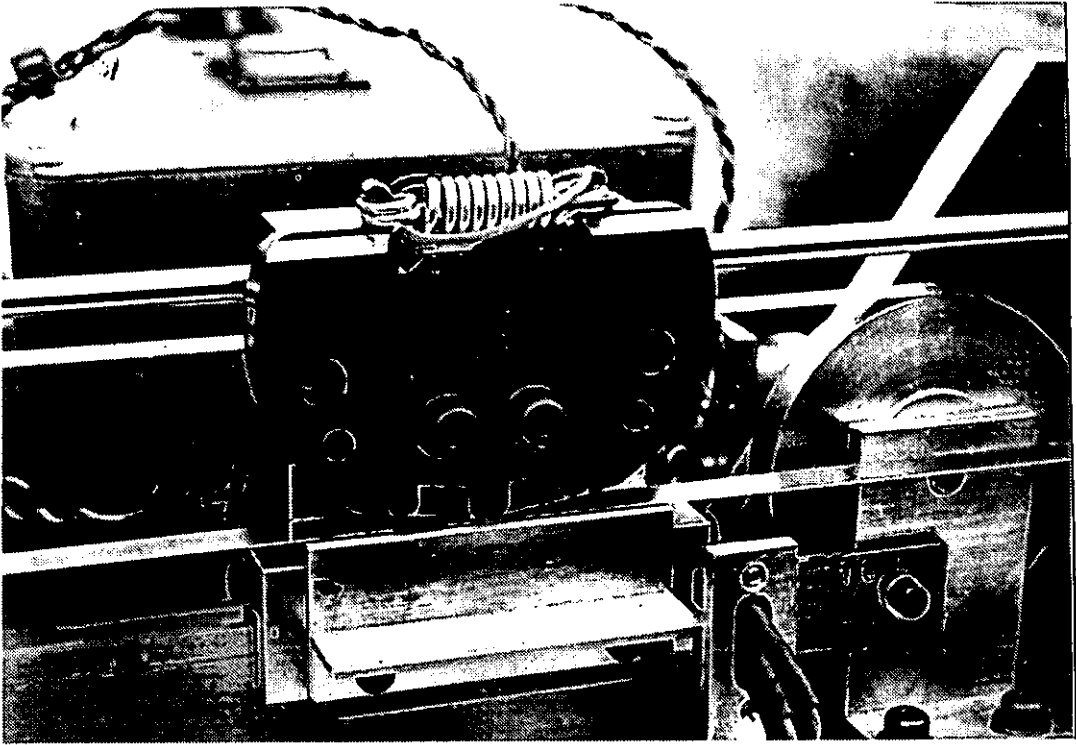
One Strip-Clutch mounted on the Machine Carriage.
